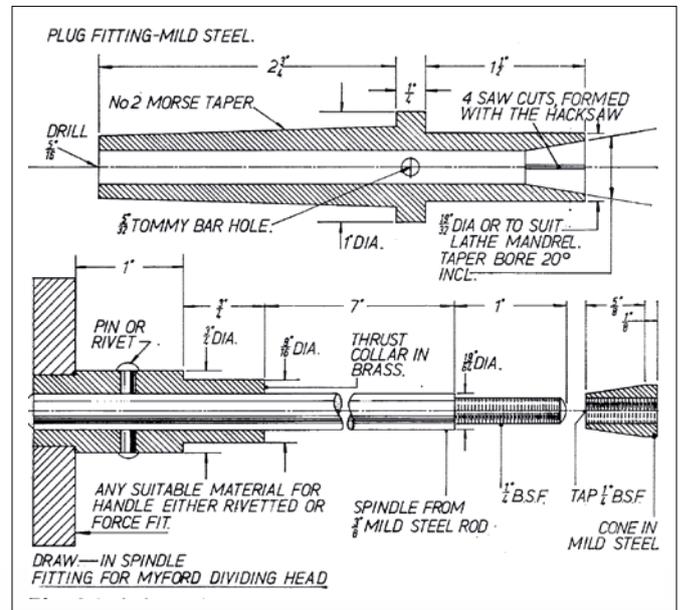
Drawings of parts required to fit Myford dividing head to Myford headstock.
